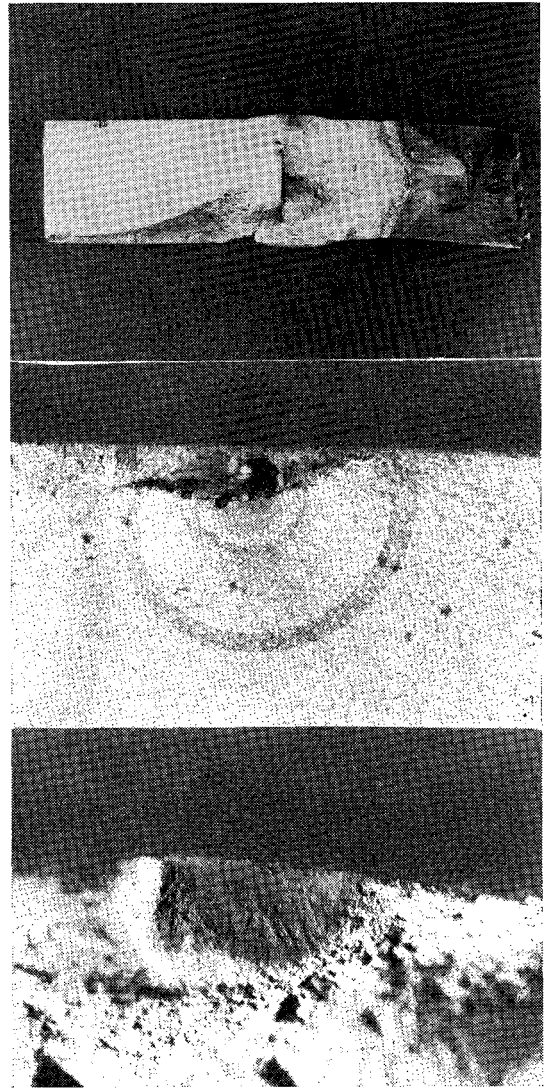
Fracture Surface with Beach Marks of T-9 Specimen.
